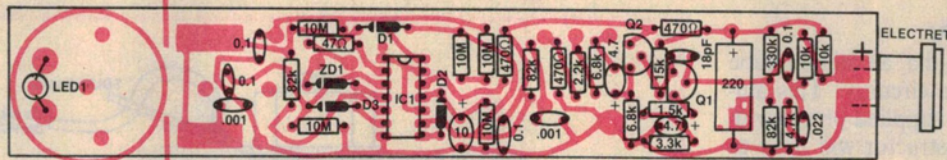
follow this parts layout diagram when installing the parts on the two PCBs.
